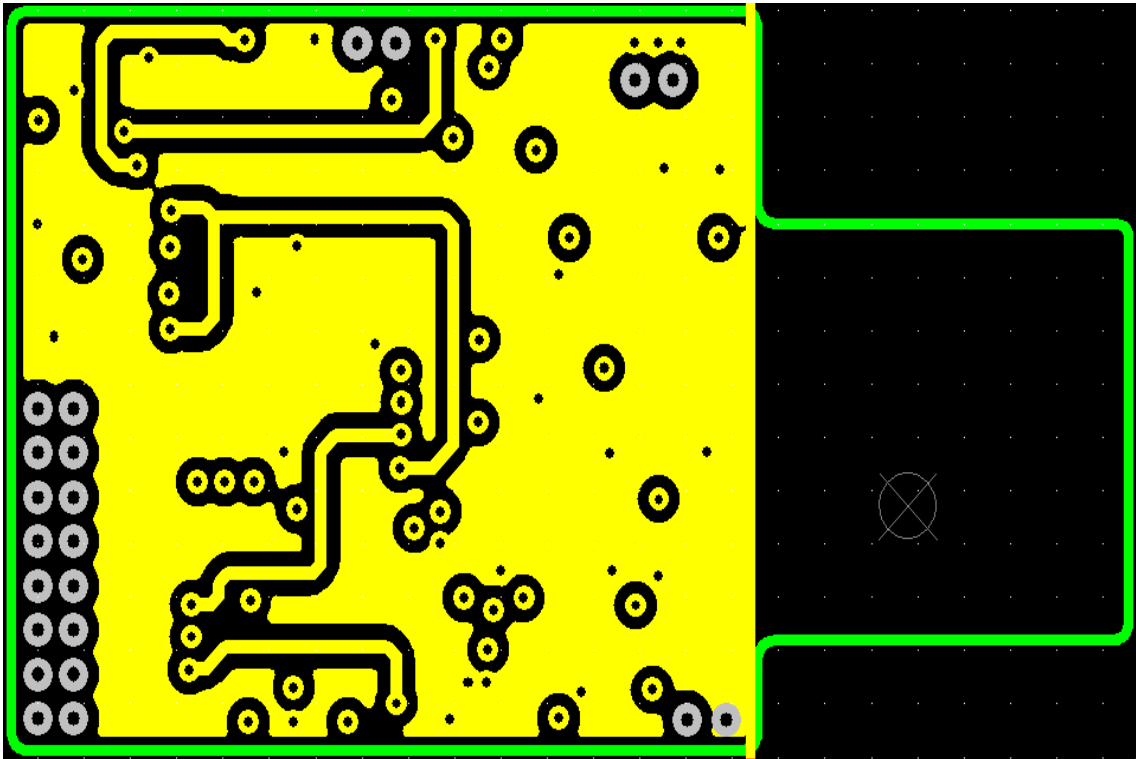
Second Layer PCB Layout of the eight channeled telemetry unit of dimension 24 mm x 13 mm
